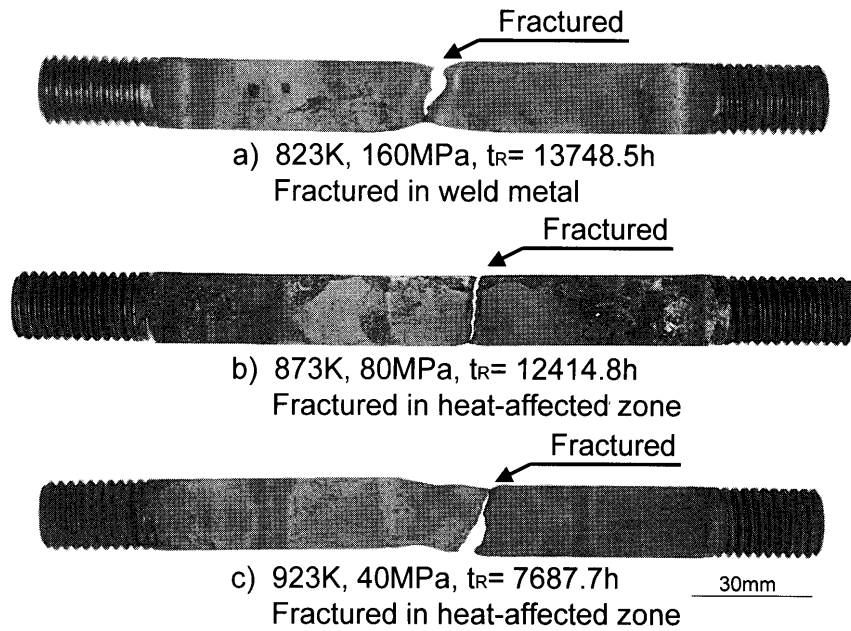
General views of the creep fractured of welded joint specimens.
